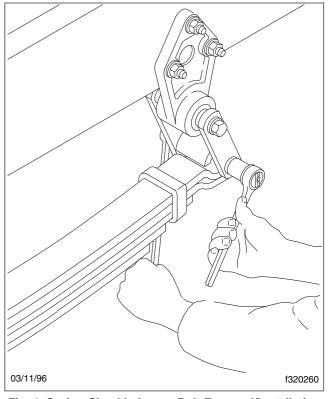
, Spring Shackle Lower Bolt Removal/Installation (typical)
